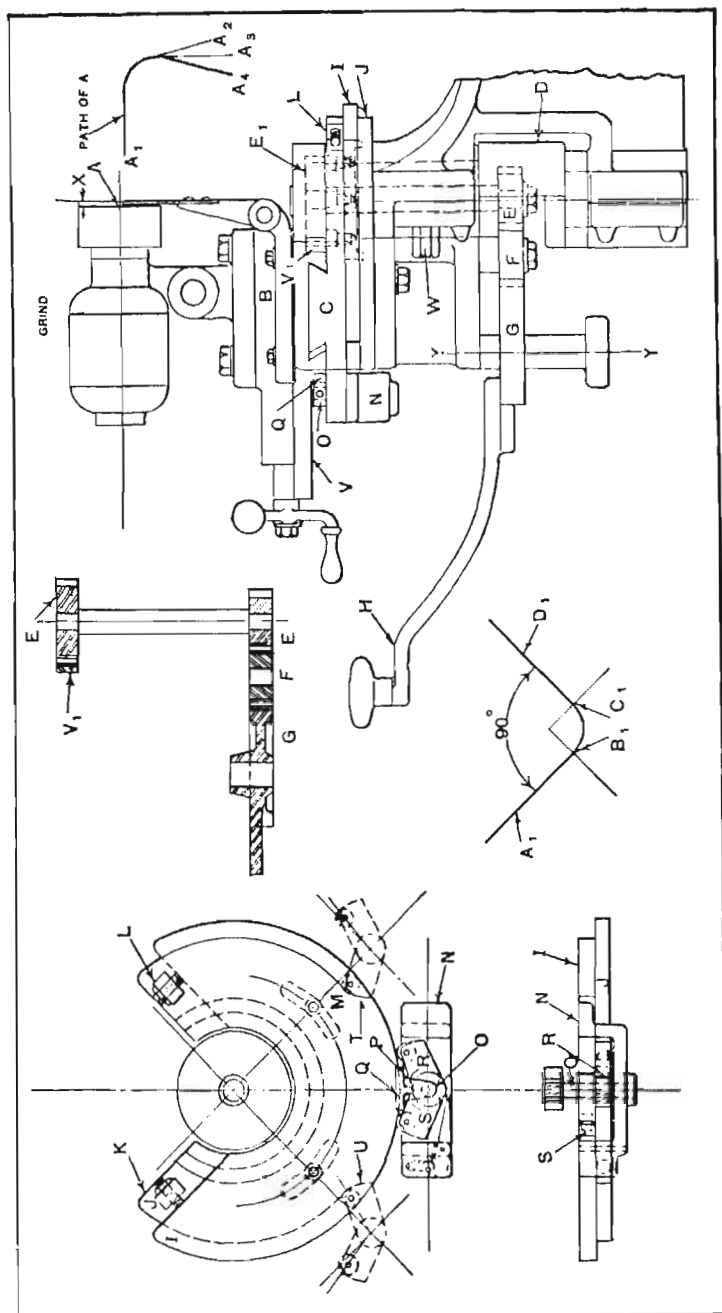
Mechanism of Contour Grinding Machine Designed for Cutter Grinding
